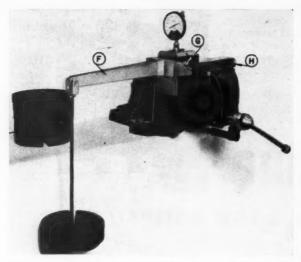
The machinability tester can be checked for accuracy by the use of weights and a beam. If necessary, it can be re-cali-brated or corrected by means of a screw at the rear end of the shank.
